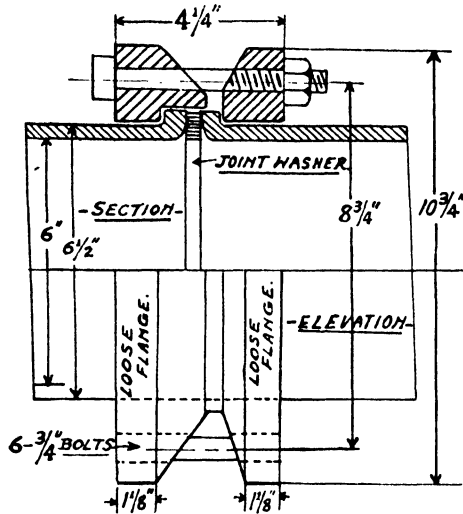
Section and Elevation of Loose-flange Pipe Joint.
